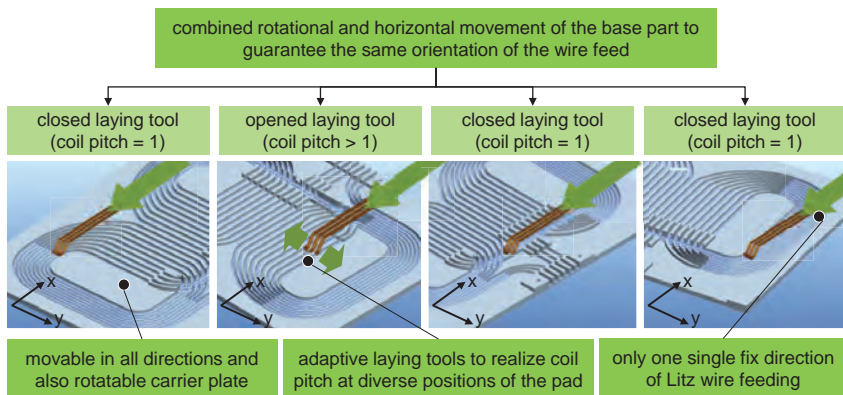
Kinematic concept for “multi-Litz-wire multi-pole-coil” pad designs.
